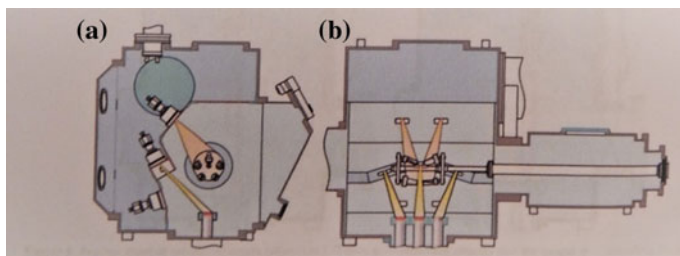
Schematic of coating deposition on gas turbine blades a side view, b front view (From The Paton Welding Journal, No. 5–6, 2016. Used with permission)
